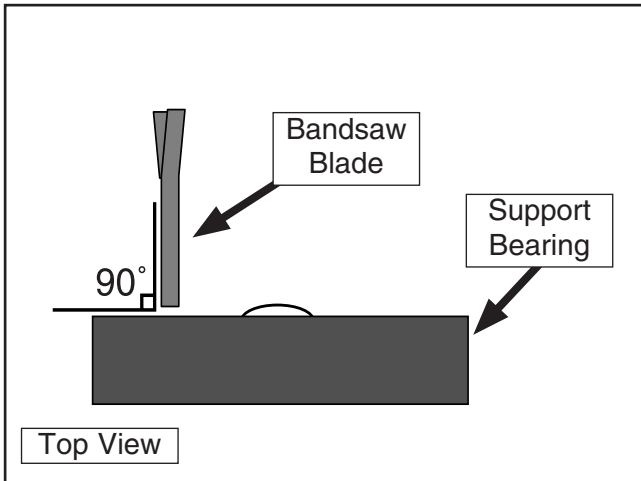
Blade should be perpendicular (90°) to the face of the support bearing.
